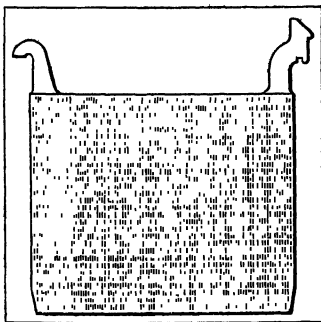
THE ONE-PIECE POSITIVE PLATE OF THE TUDOR CELL
